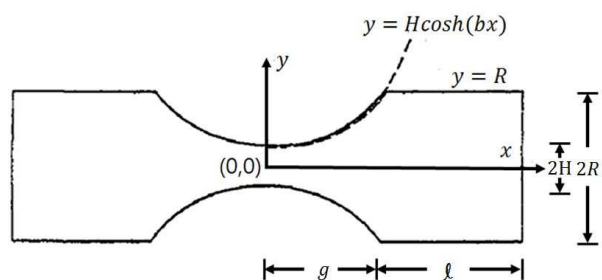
Specimen with circular profile gauge flanked by two cylindrical shoulders⁽³⁾
